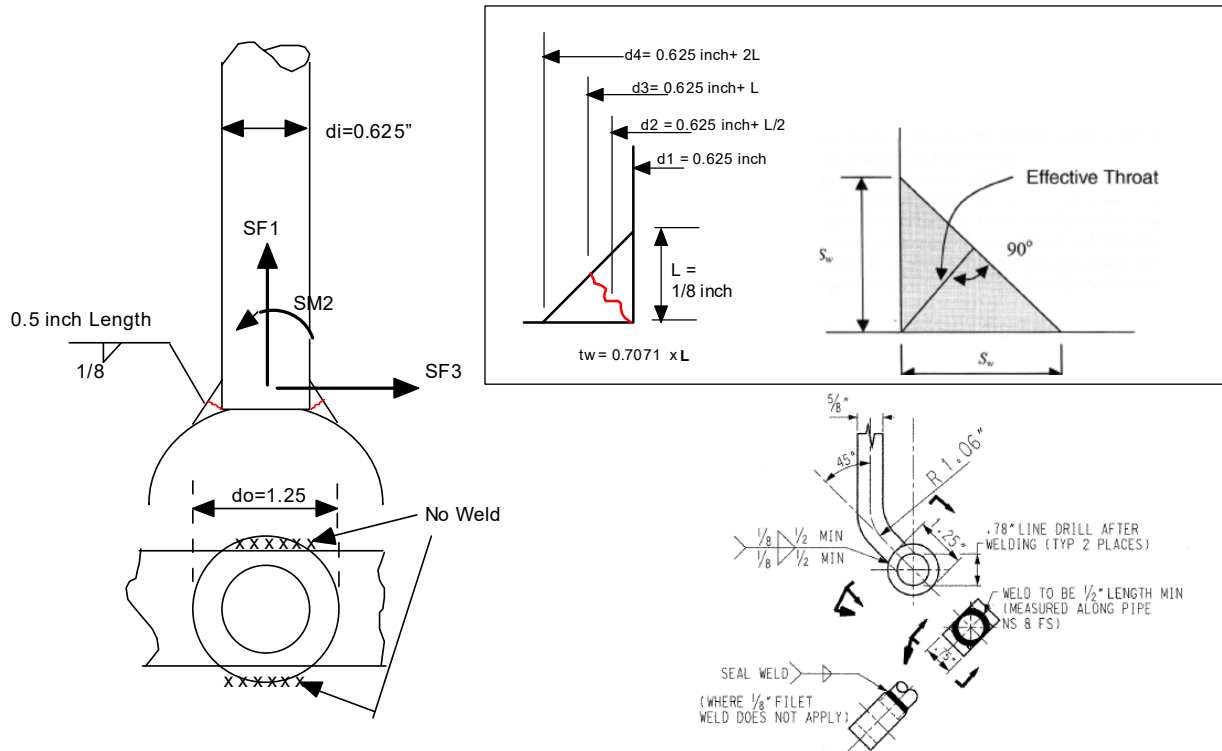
Weld Detail for Lift Bar, Outer Carrier
